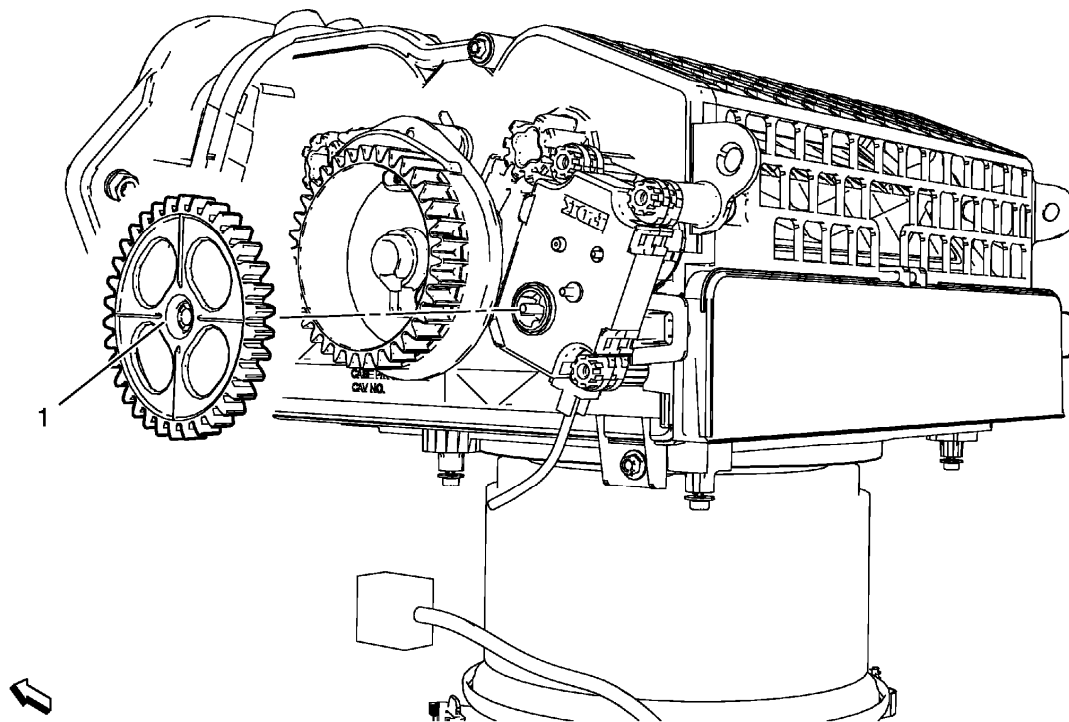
Air Inlet Valve Actuator Gear (Left Hand Drive)
